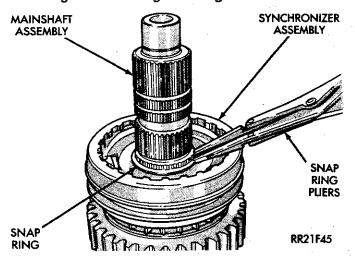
Removing/Installing Synchronizer Snap Ring foreign material are removed from the surfaces of every part.
